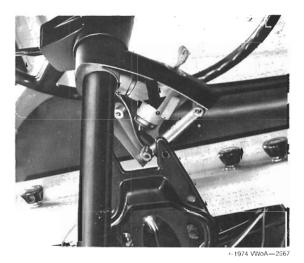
Ignition/starter switch retaining screw (arrow).
